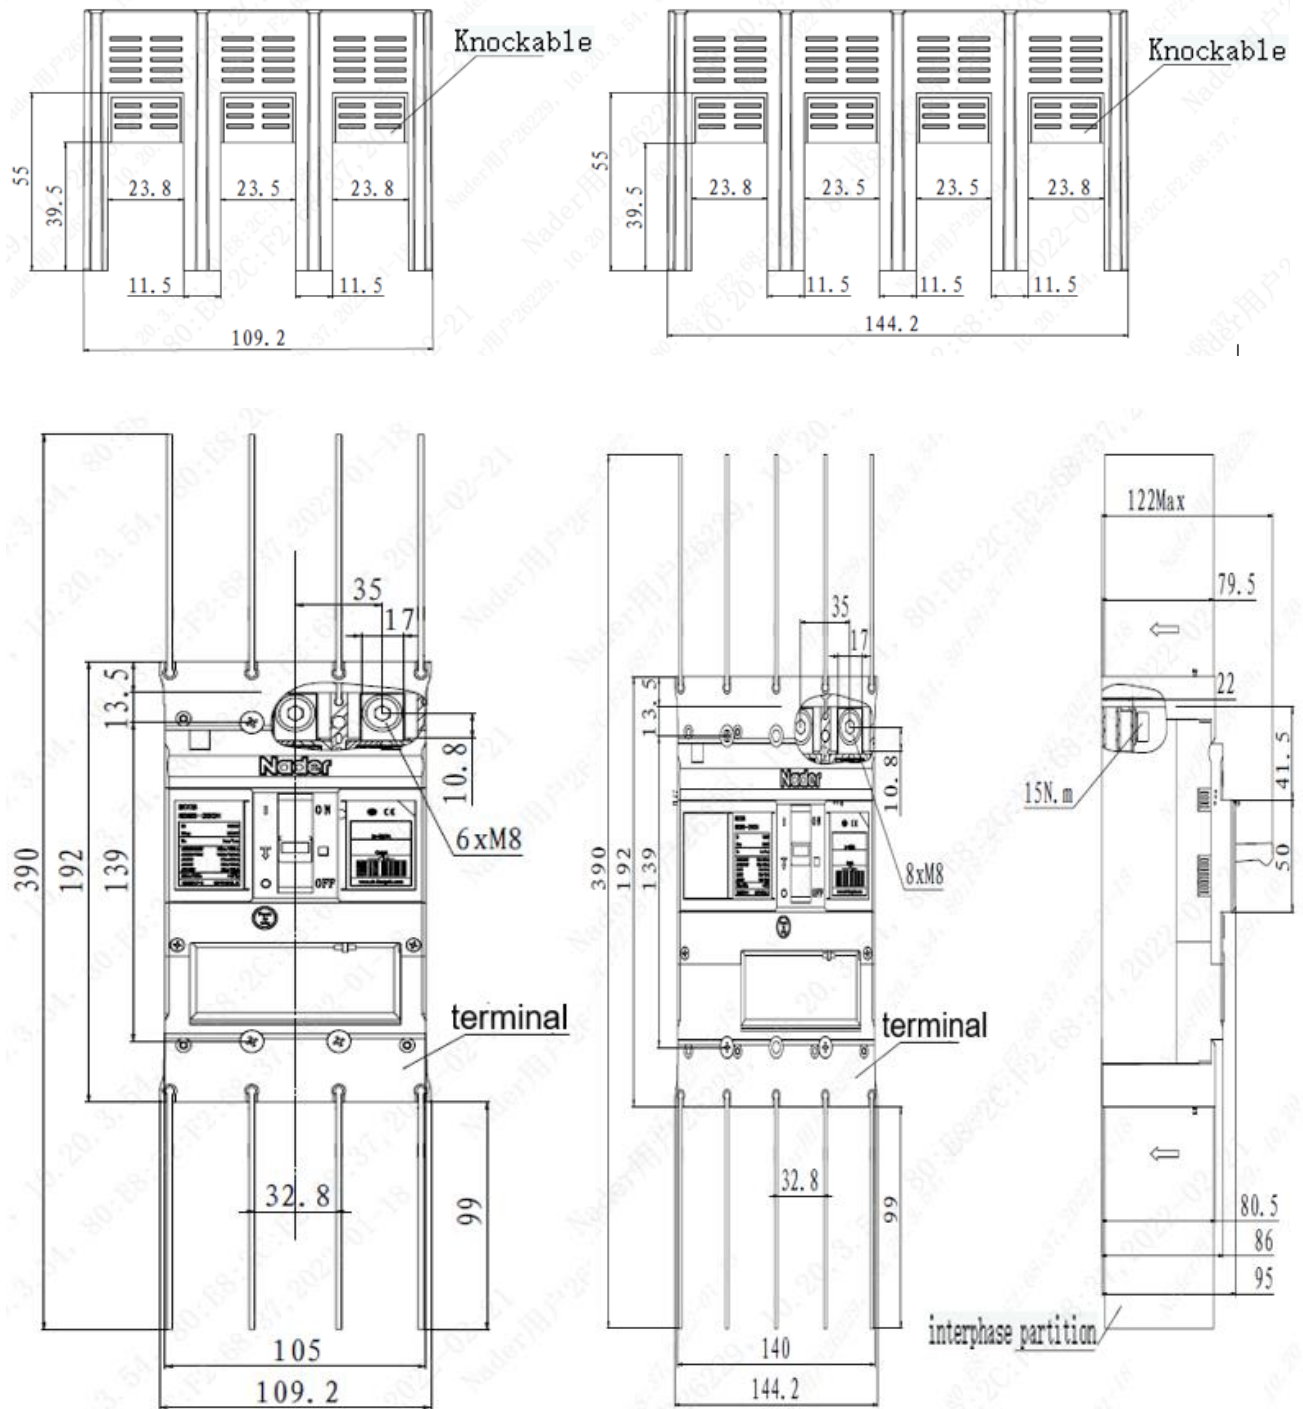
NDM5-250L/M/H 2/3/4P Outline dimension drawing of front board wiring products
